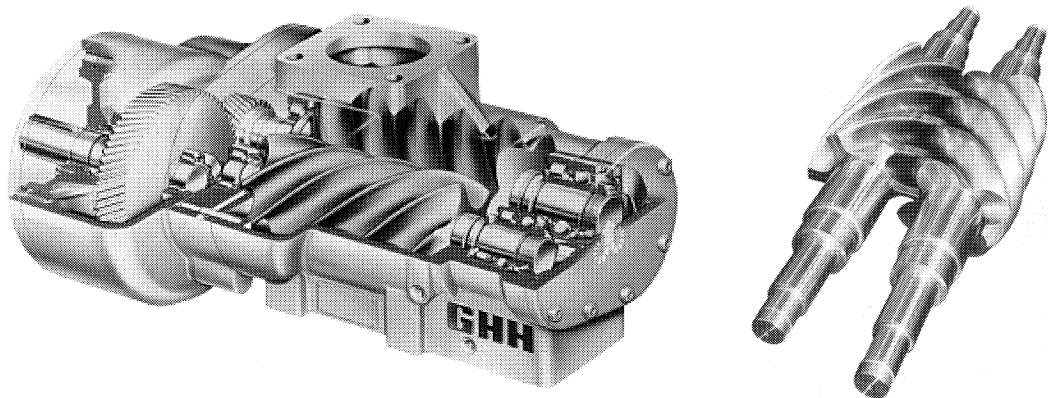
Example of a dry screw compressor design (left) and screw-type machine rotors (right)
